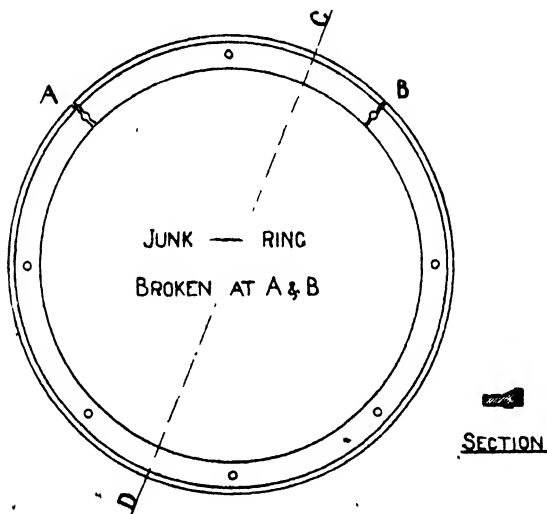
ILLUSTRATIONS SHOWING WHERE CLAMP
